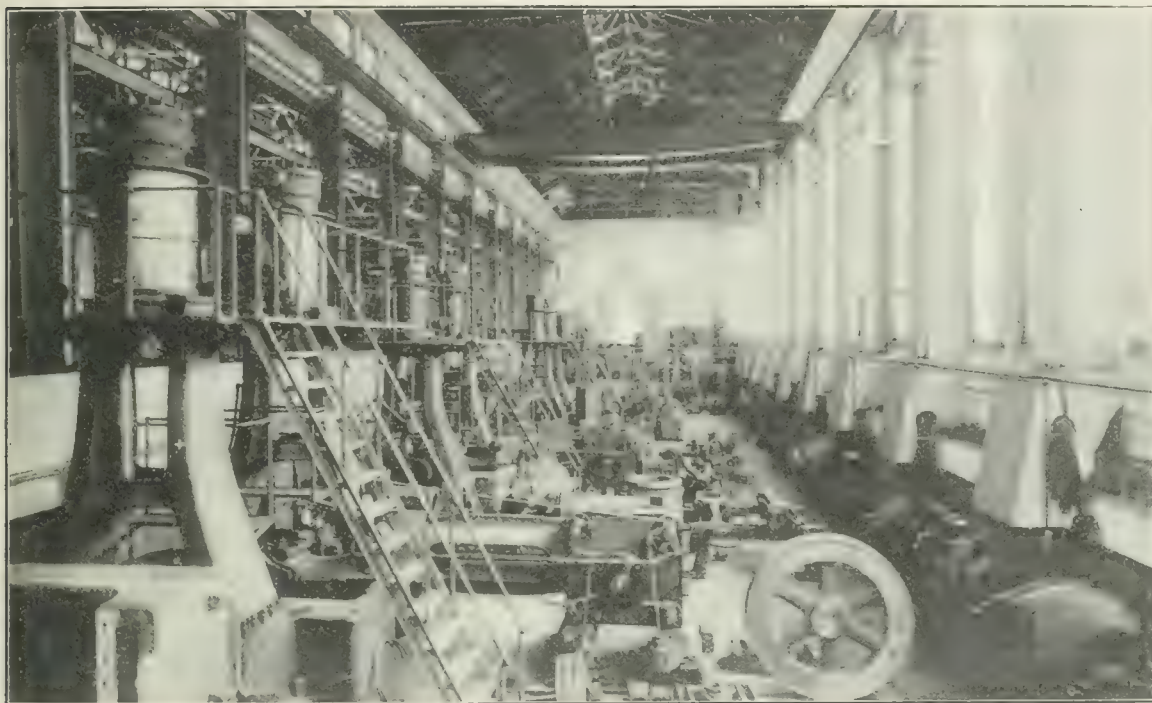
Rearrangement of Pit in Erecting Shop.
